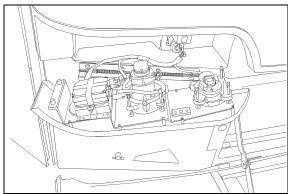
OPENING HEADLIGHT ASSEMBLY
